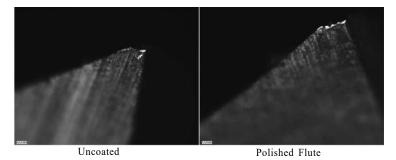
Uncoated and polished cutting tools edge after machining at 500X.
